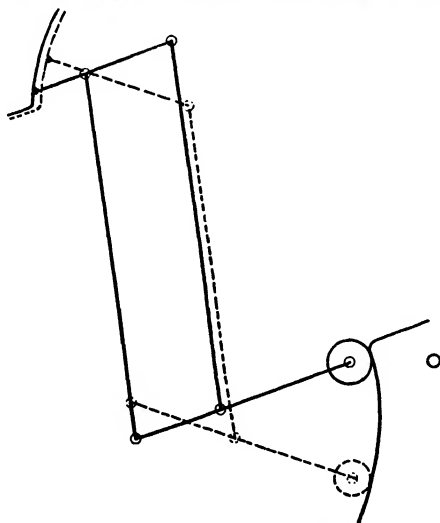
Pantograph Mechanism for Truing Abrasive Wheels in Formed Wheel Gear Grinder.
